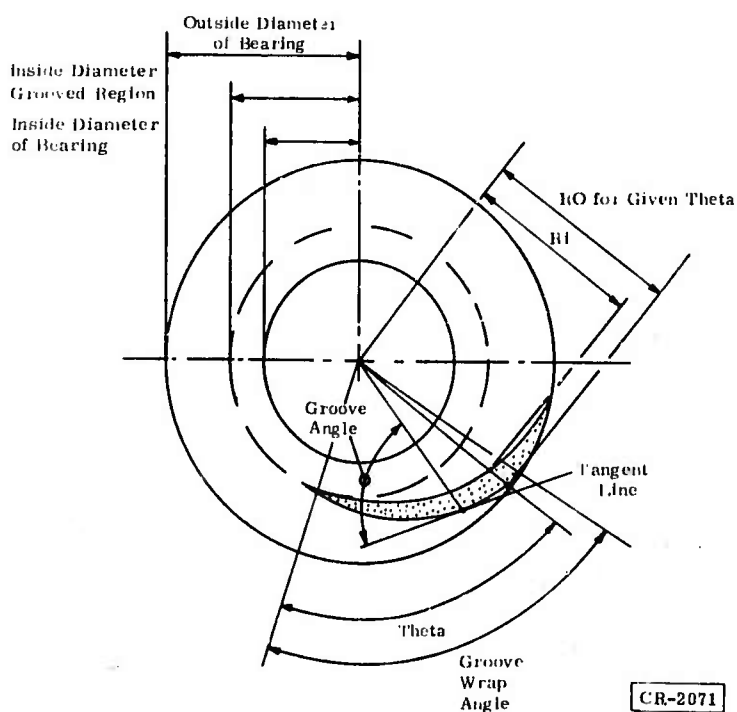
Schematic Diagram of Spiral Groove Thrust Bearing
